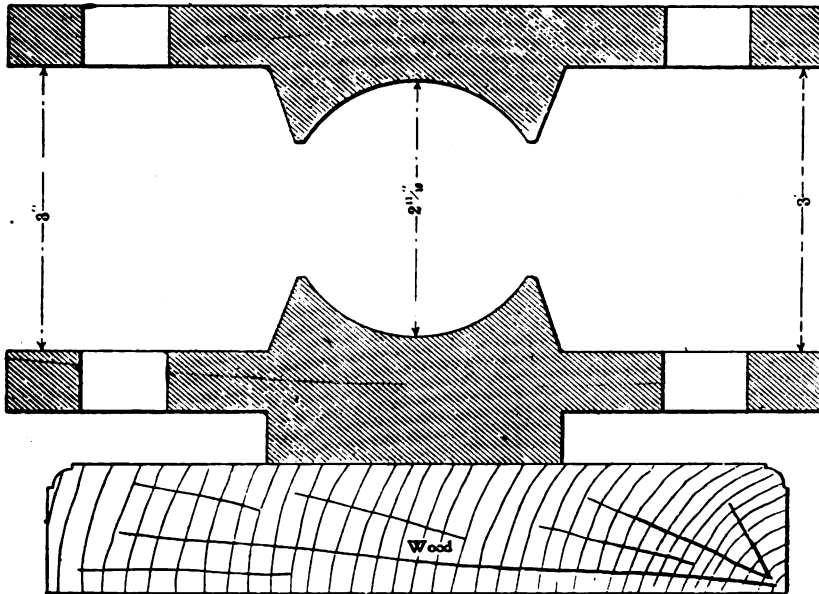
TRANSVERSE SECTION OF FIELD-MAGNET YOKES AND POLE-PIECES.
